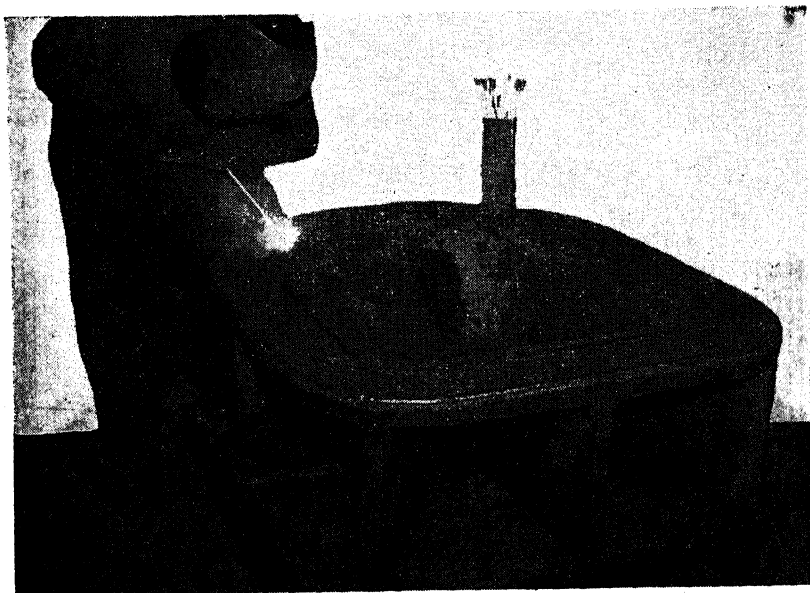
Reclaiming wheelbarrow stamping die by building up worn face with tool steel electrode. Deposit is then ground to a flat, smooth finish. Required 80 lbs. of electrode and 100 hrs. of labor. Saved \$1200 per die.
